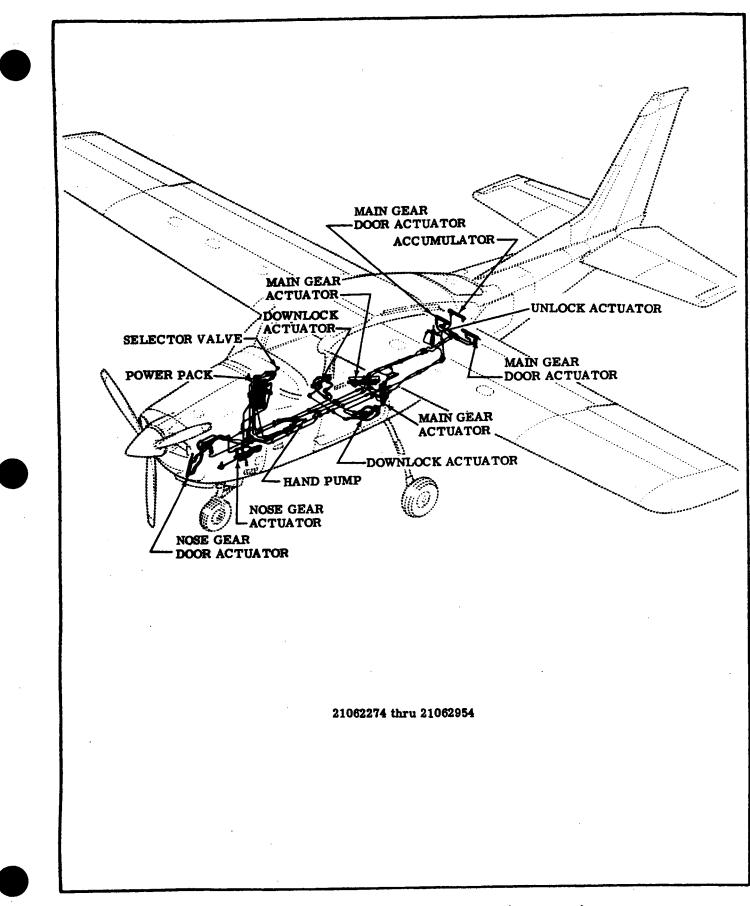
Hydraulic System Components (Sheet 2 of 3)
